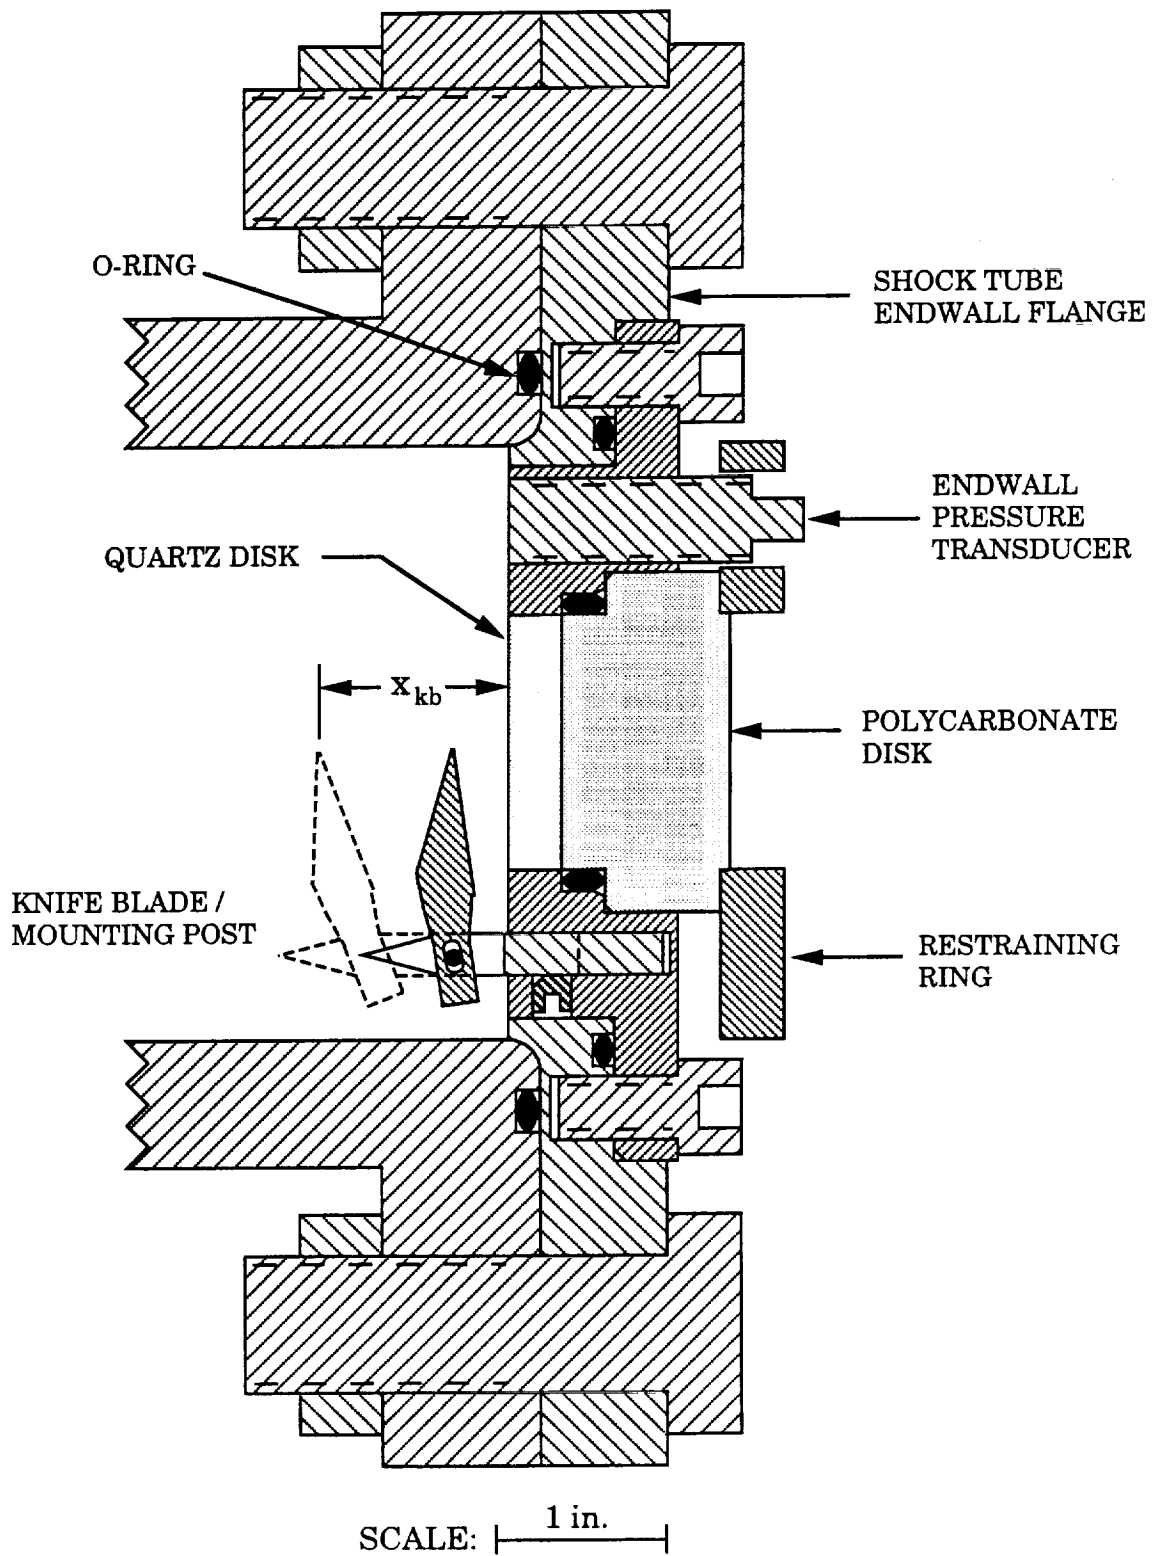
Sectional drawing of the endwall observation window assembly.
